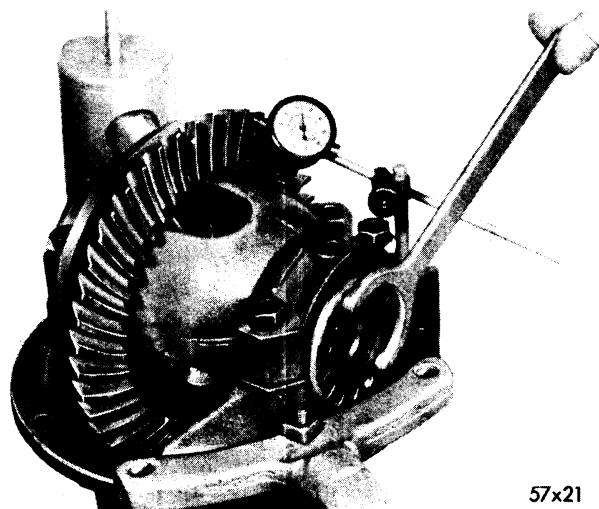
Checking Back Lash between Drive Gear and Pinion
